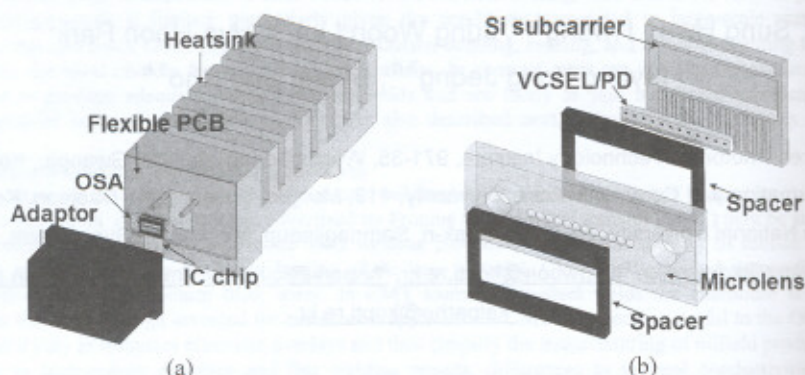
Drawings of (a) the parallel optical interconnection module (b) the optical subassembly.
